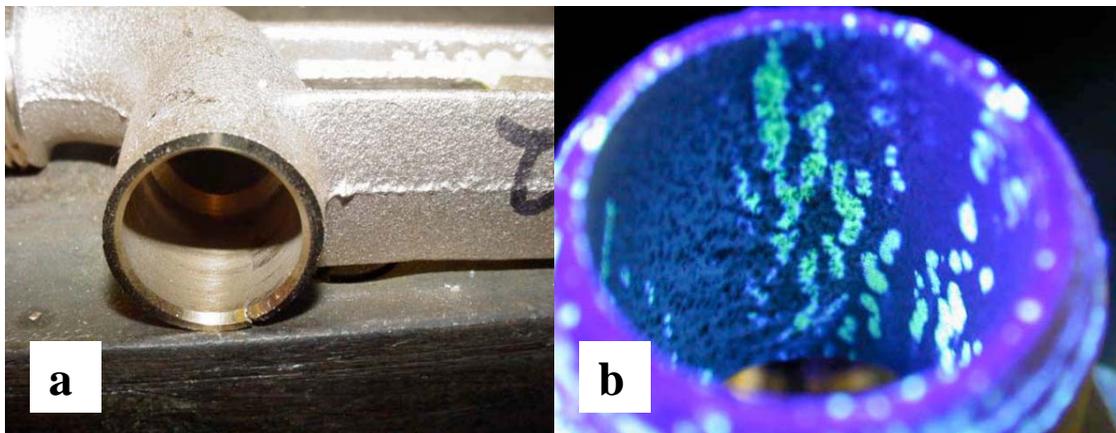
a) Envirobrass II (C89520) casting with presence of a visible crack in the bottom of the machined surface. b) Envirobrass II (C89520) casting, which did not show visible cracks to the naked eye. Cracks were revealed as light green areas during a fluorescence penetration test. (Ford Meter Box Company 2005a)
